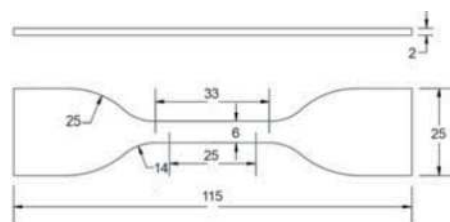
Dumbbell-shaped tensile specimen (unit: mm).
